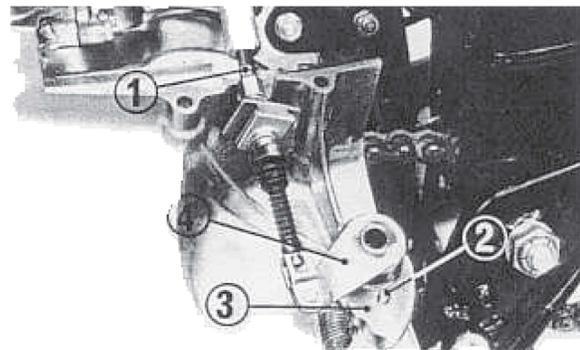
(1) Clutch cable (2) Locking bolt (3) Fixing piece (4) Clutch lifter
